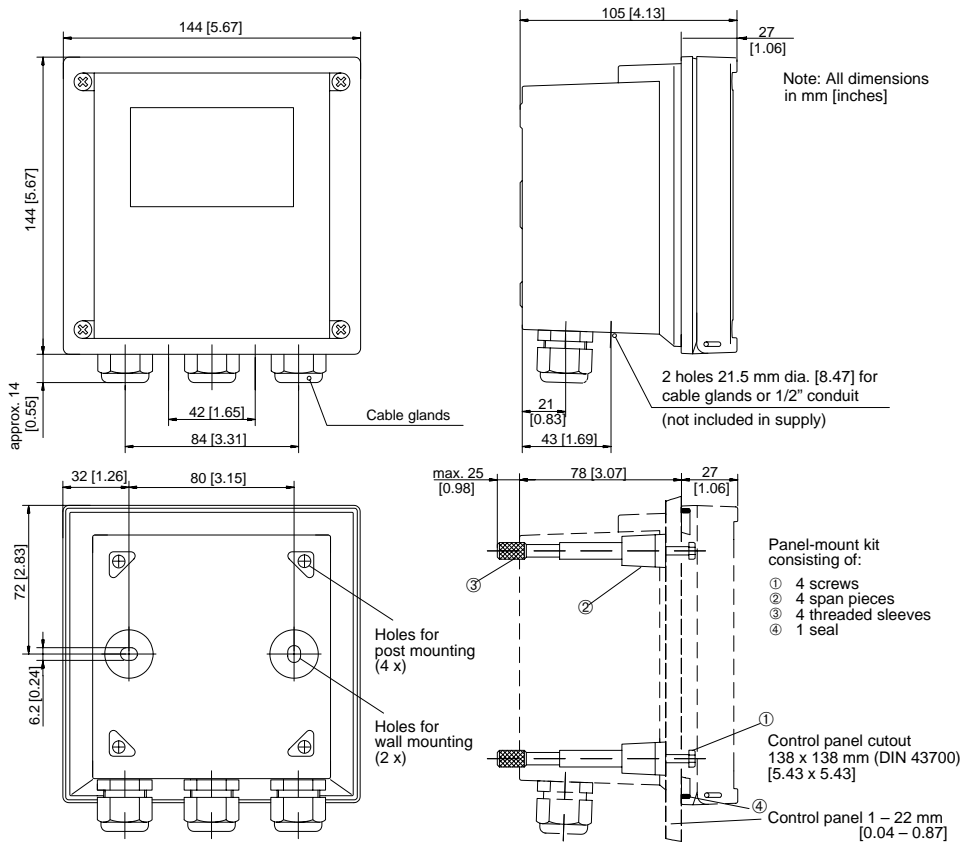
Dimension drawing for Transmitter, mounting diagram and P/N 51205990-001 panel-mount kit
